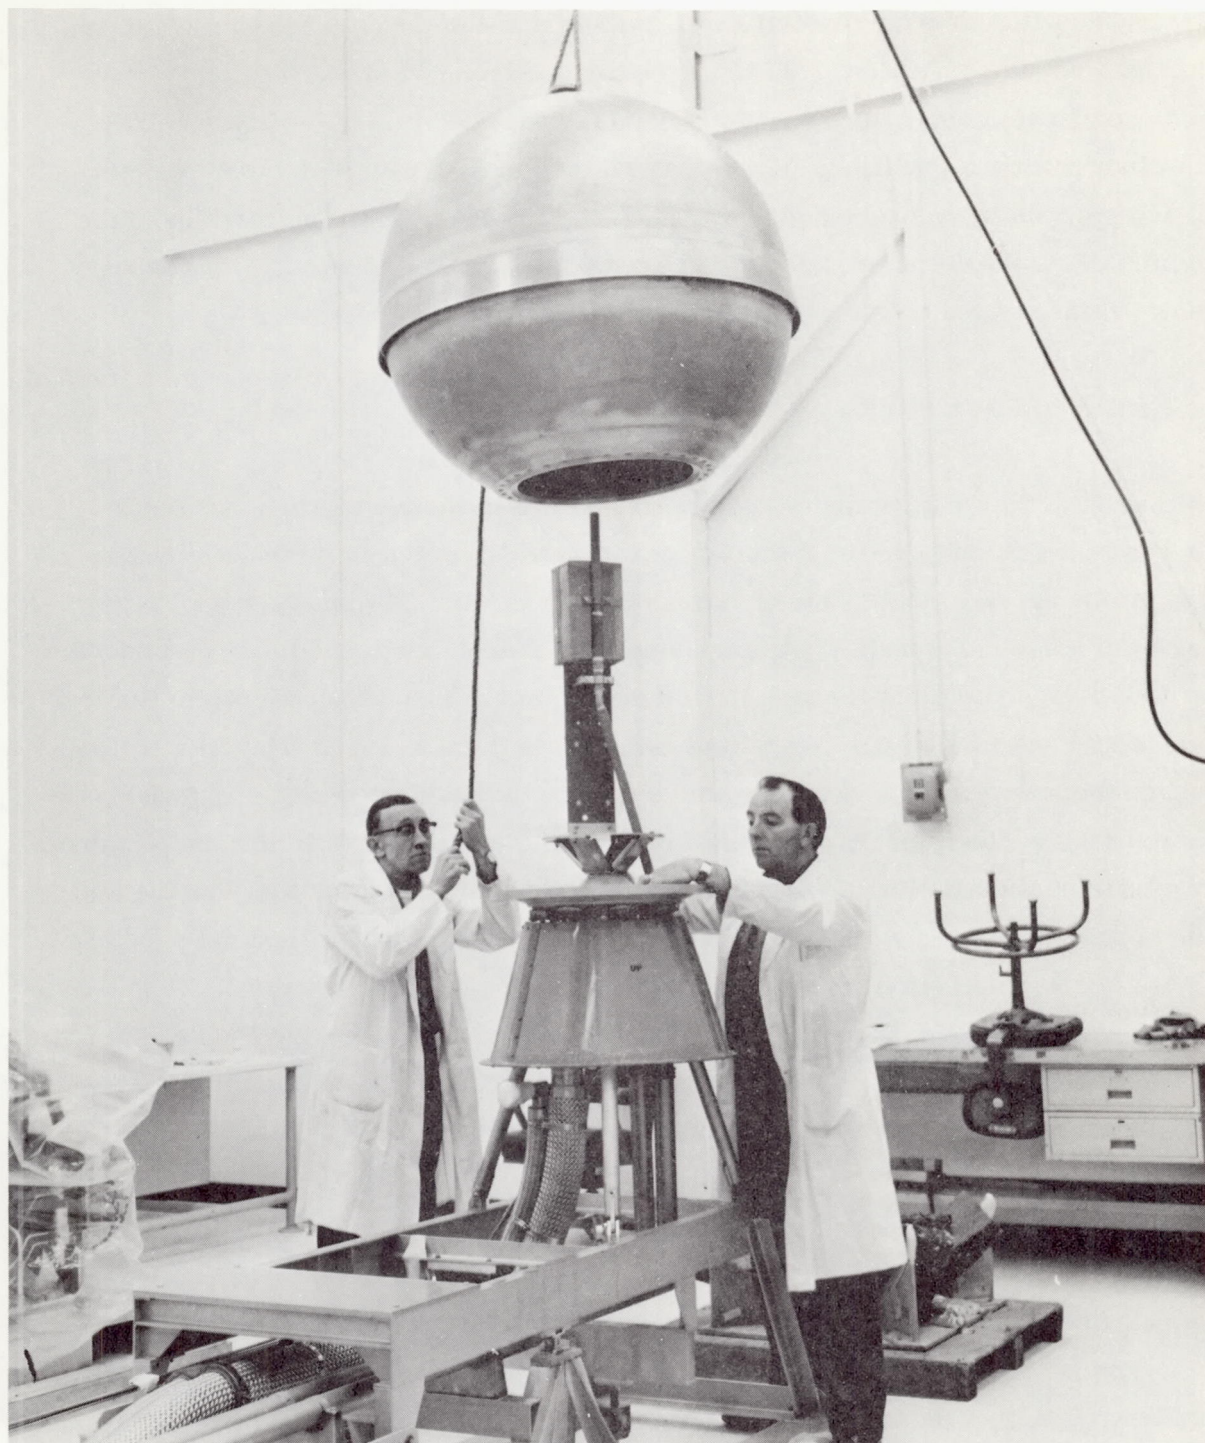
Tank and Supporting Structure During Prefit Assembly
